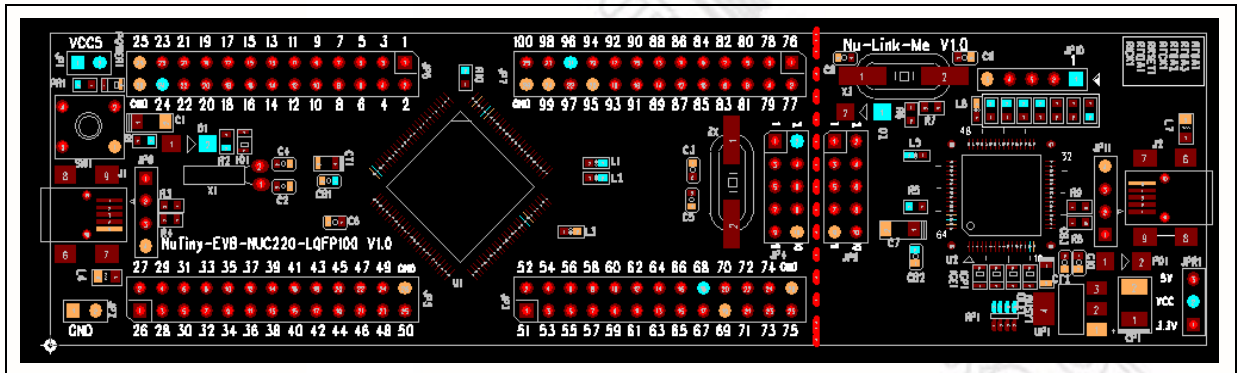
NuTiny-SDK-NUC220 PCB Placement
